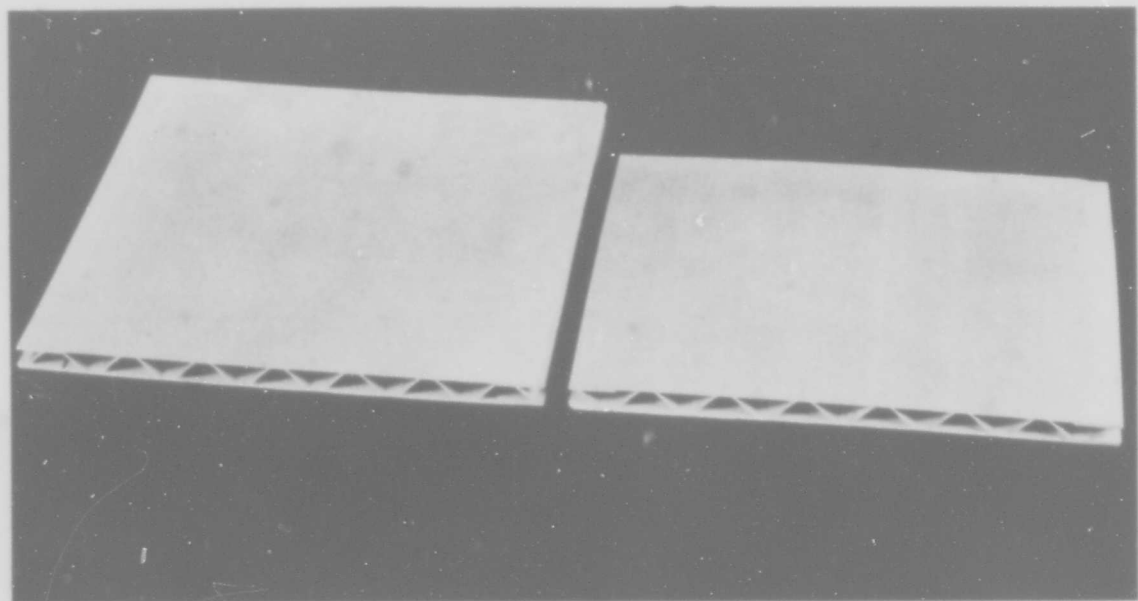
PHOTOGRAPH OF BERYLLIUM PANEL 67-1 AFTER SECTIONING AND LEACHING
